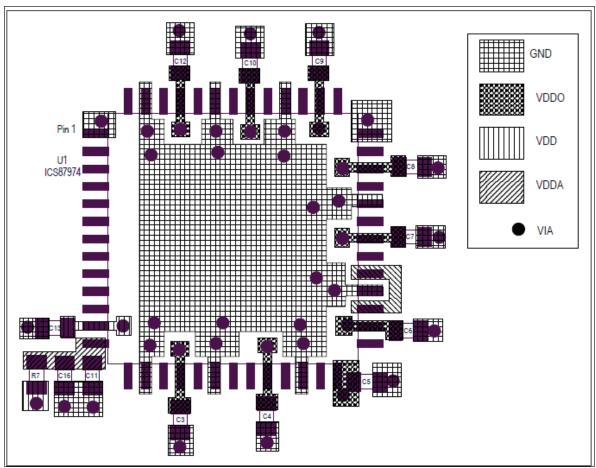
B. PCB BOARD LAYOUT FOR 879741
